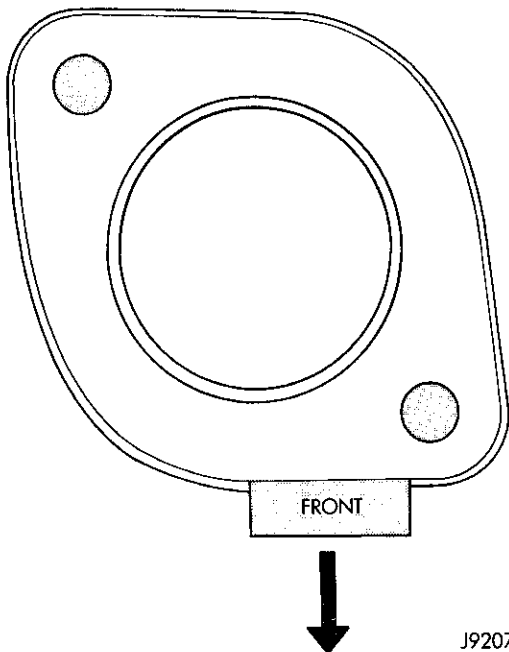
Thermostat Position—3.9L V-6 or 5.2/5.9L V-8 Gas Engines
